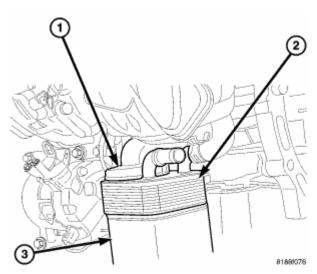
OIL COOLER Courtesy of CHRYSLER LLC
